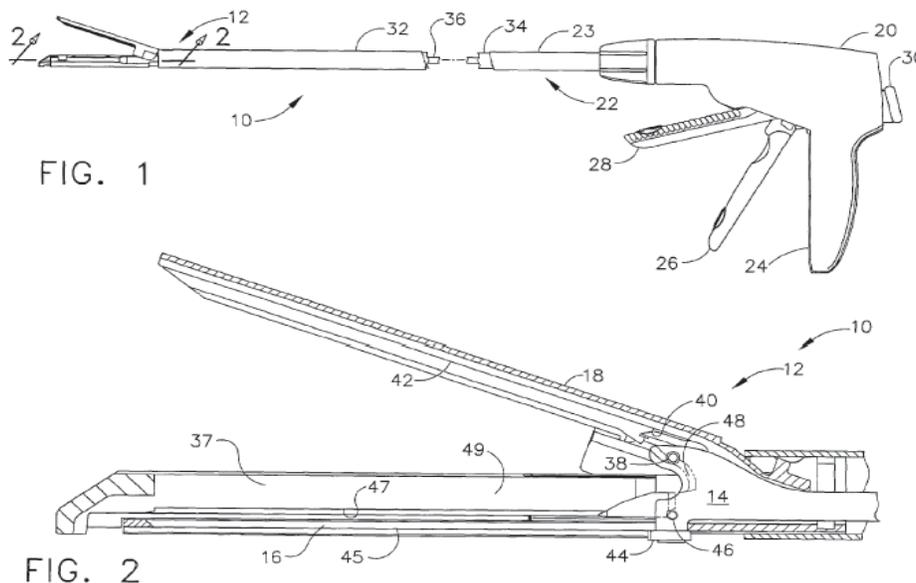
above “depicts a partially cut-away side elevation view of a surgical stapling and severing instrument in an open position.” *Id.* at 2:62–64. Figure 2 above “depicts a cross-sectional side elevation detail view along the line 2—2 of FIG. 1 of an end effector of the surgical stapling and severing instrument.” *Id.* at 2:65–67. Stapling and severing instrument 10 includes end effector 12 and handle portion 20. *Id.* at 4:22–36. End effector 12 includes “E-beam firing mechanism (‘firing bar’) 14 that advantageously controls the spacing of the end effector 12. In particular, an elongate channel 16 and a pivotally translatable anvil 18 are maintained at a spacing that assures effective stapling and severing.” *Id.* at 4:26–28. “[E]longate channel 16 receives a staple cartridge 37.” *Id.* at 5:2–3. “[F]iring bar 14 advantageously includes a middle pin 46 that passes through a firing drive slot 47 formed in a lower surface of the cartridge 37 and an upward surface of the elongate channel 16, thereby driving the staples. . . .” *Id.* at 5:24–27.
